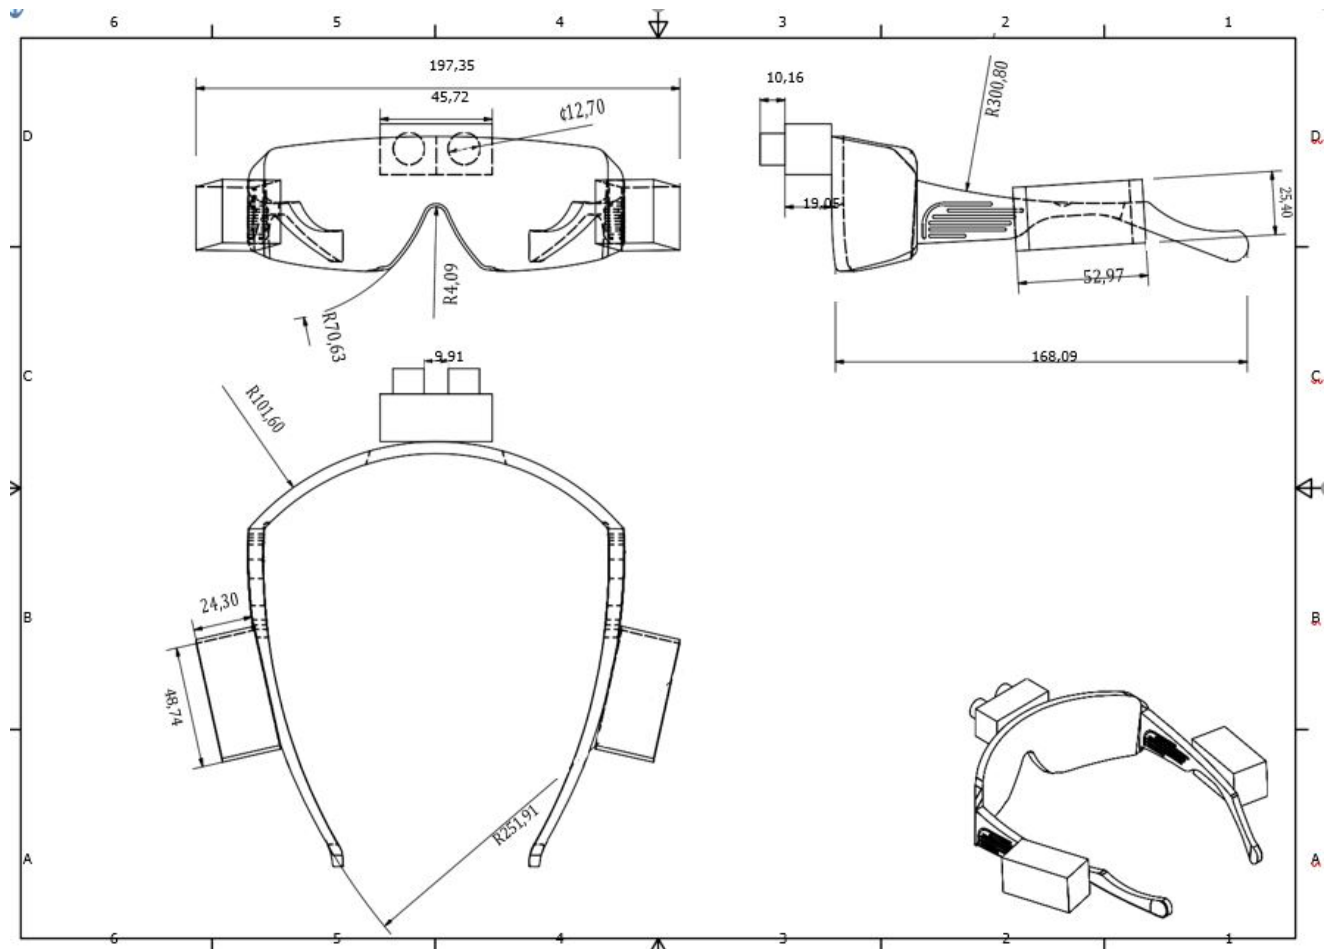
Engineering Drawing of the Electronic Glasses in millimeters.
